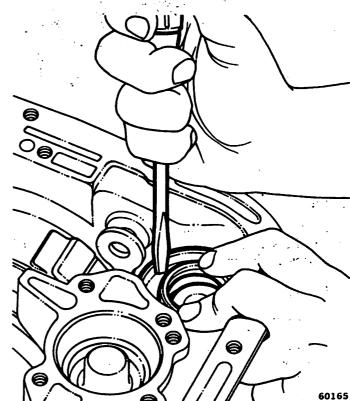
C-40 Rear Servo Spring and Snap Ring Removal
